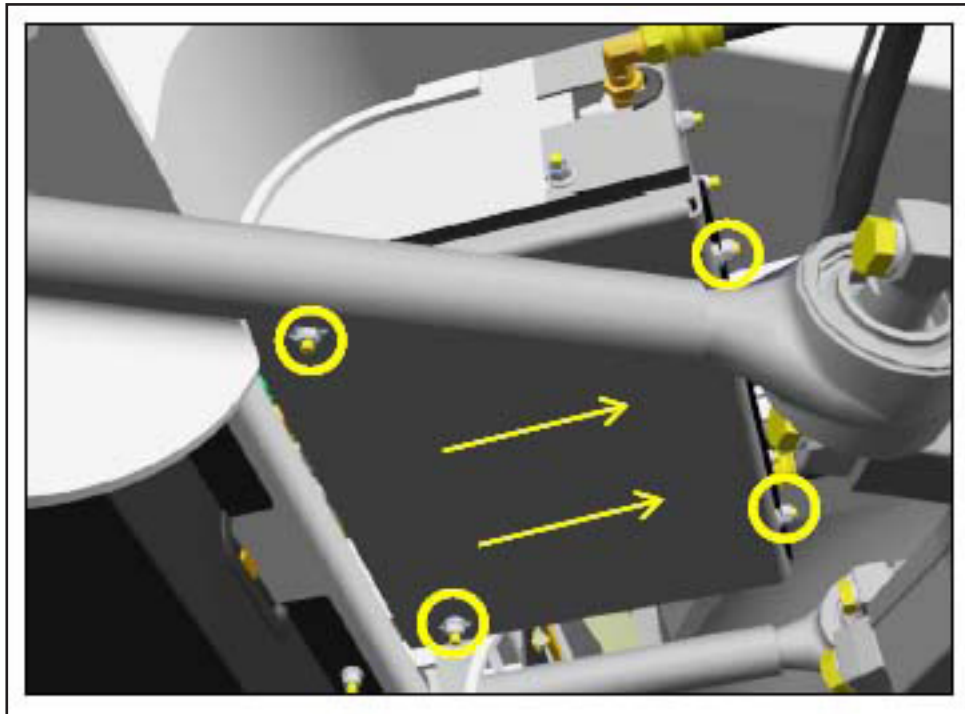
Brake Valve Cover Removal to Access the Rear Harnesses
